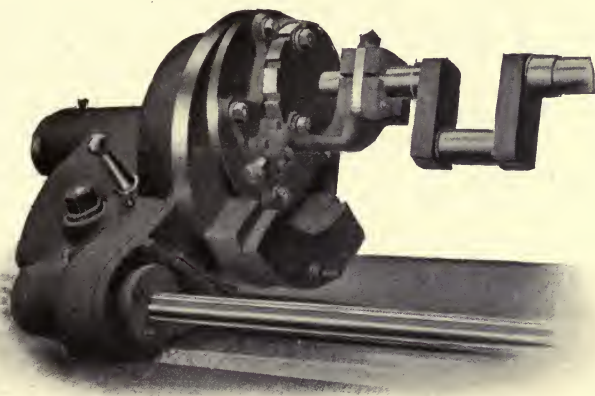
METHOD OF DRIVING CRANK SHAFTS—LANDIS
